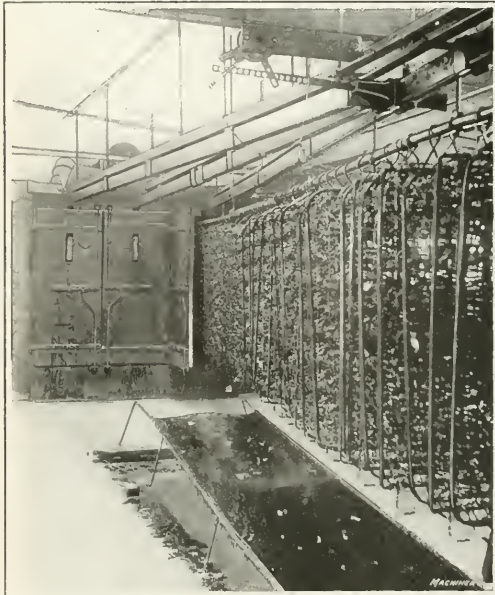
Springs passing over Drain Board to fill One Compartment of Japan Baking Oven
